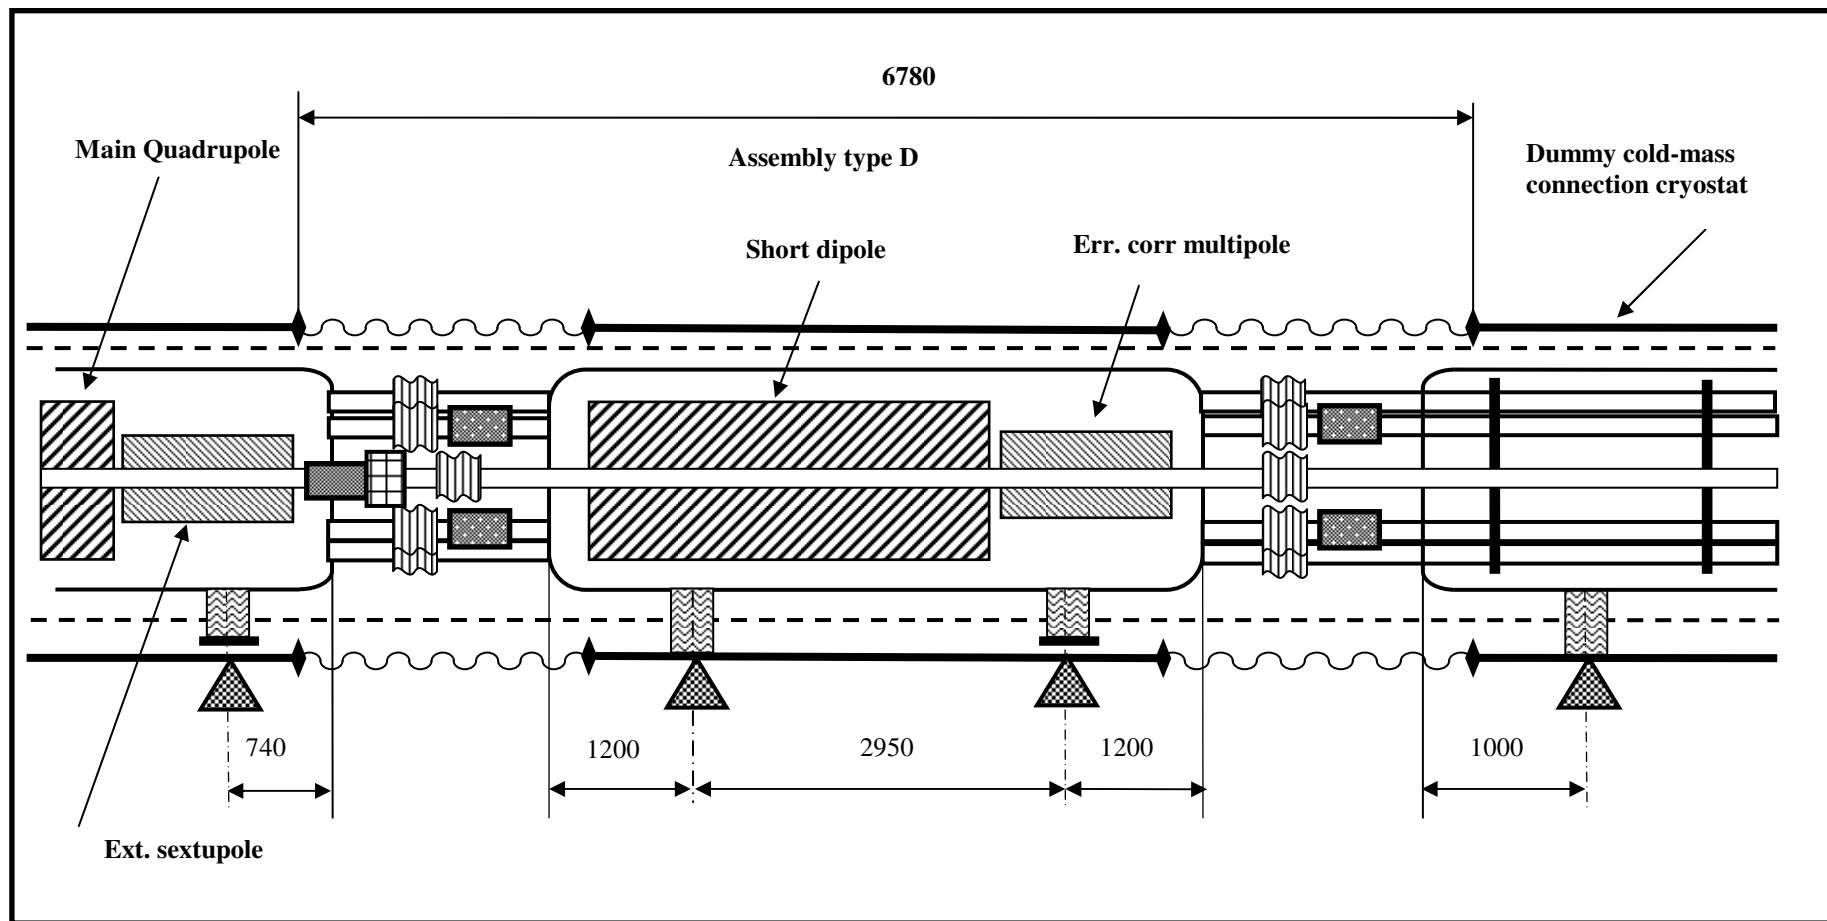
Location of fixed and sliding supports – side view (short dipole)
